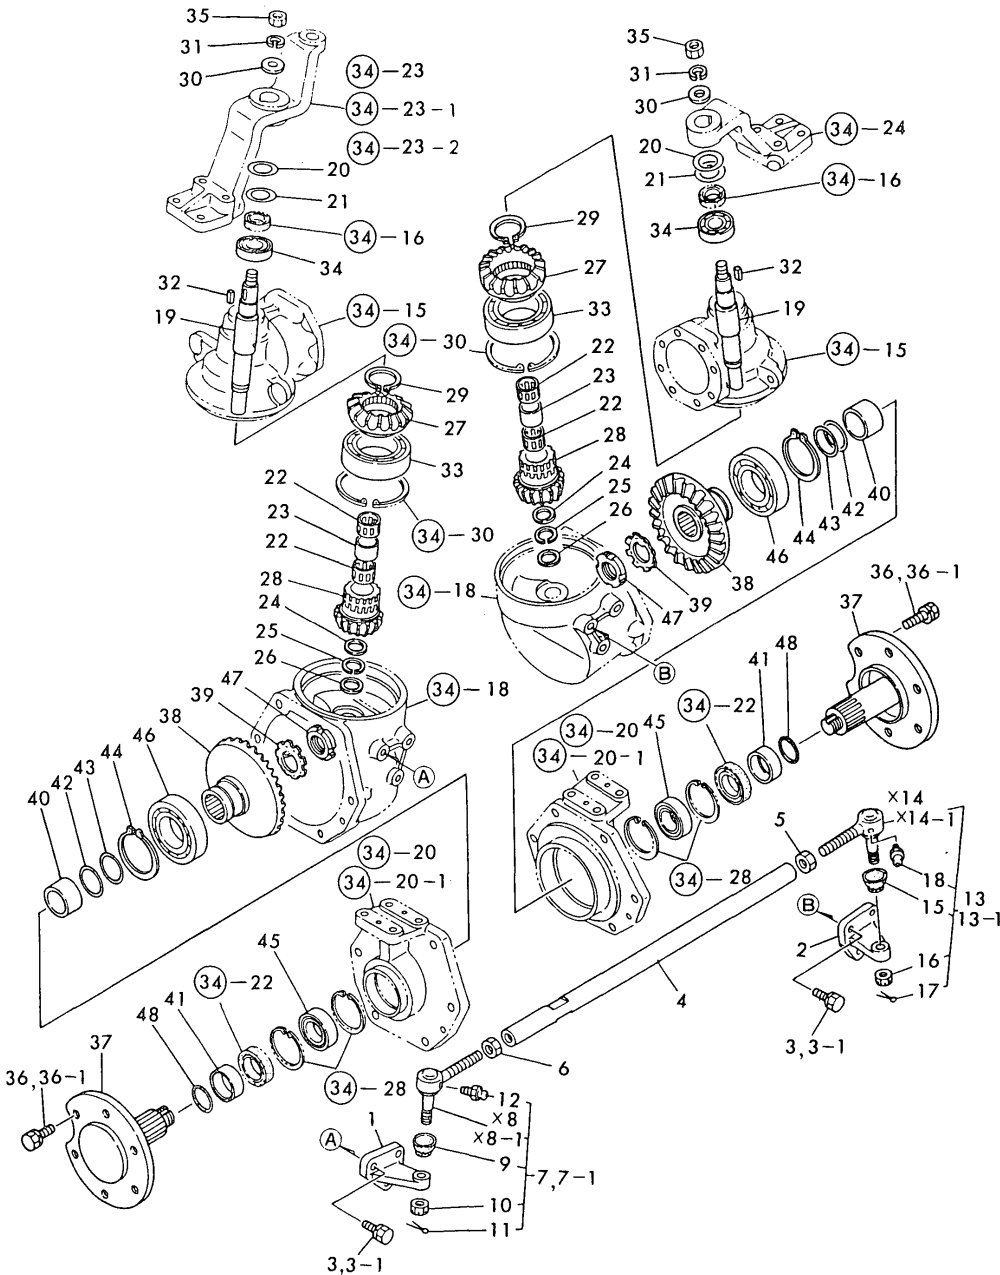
2ND SHAFT & FRONT SPINDLE
